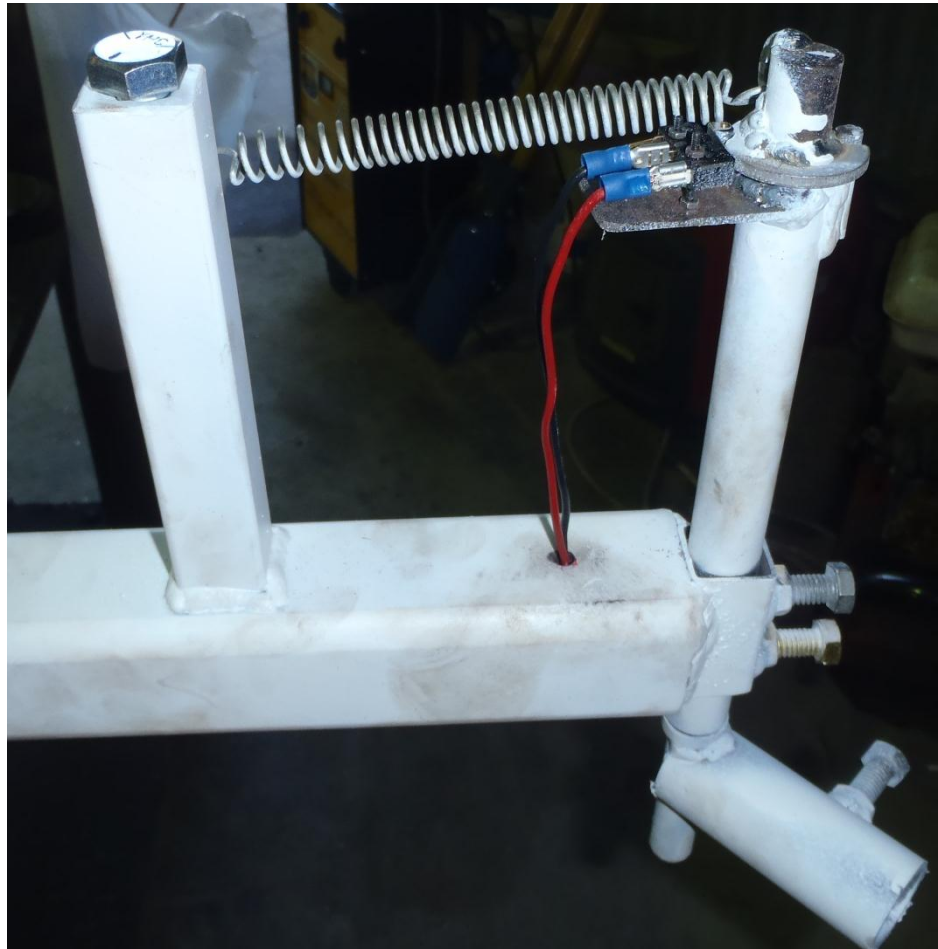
The image shown is the completed feeler arm. The bow rod is not attached and the shielding plate is removed to show components.
